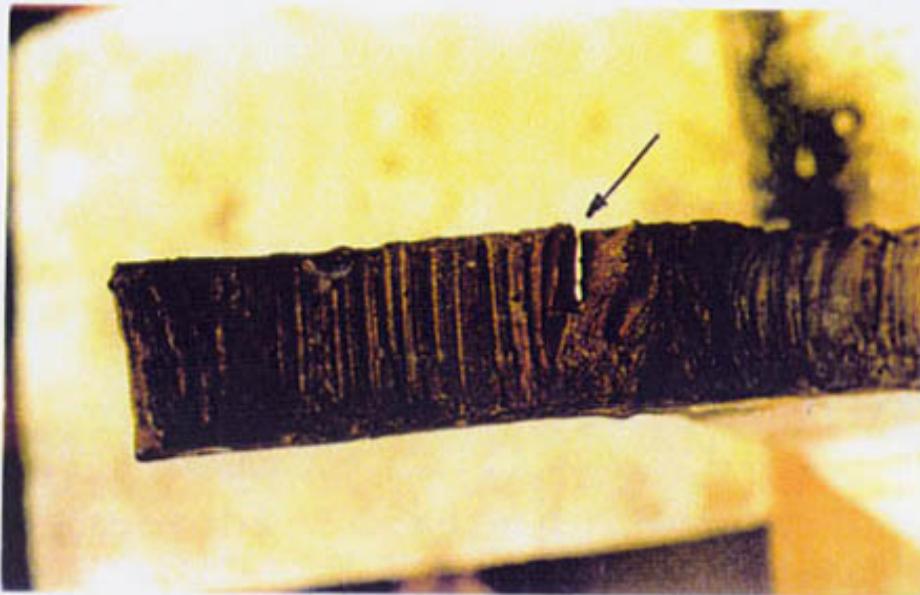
Penetrated secondary cracks at starboard A3 fracture area
